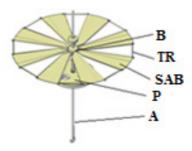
ASRBHK turbine construction (B – bearing, TR – tensioning rubber, SAB – self-adjusting blade (SAB), P – pulley, A – axis) [28].
